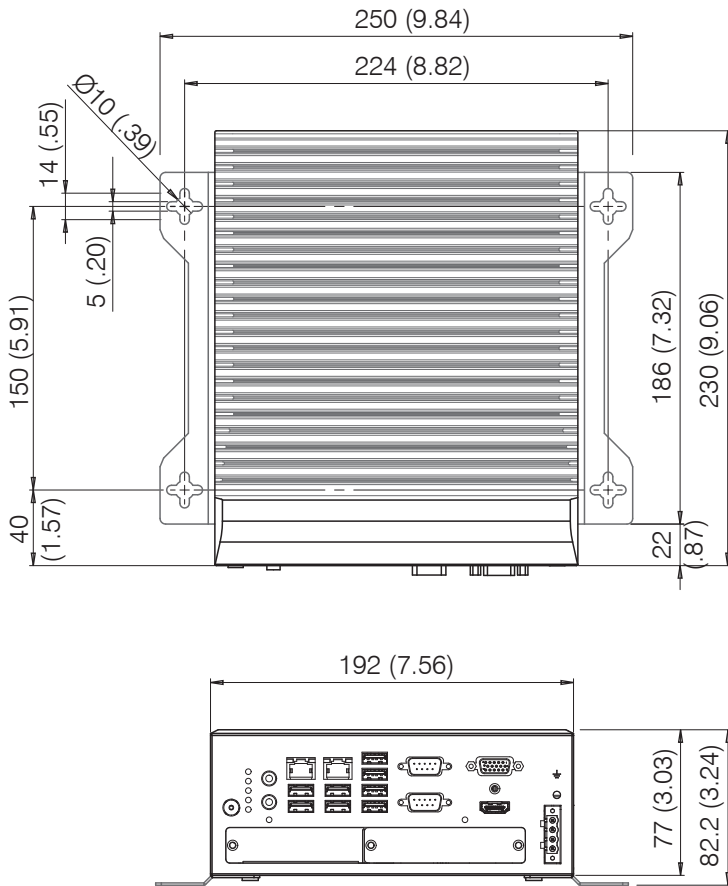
Dimensional drawing of SC2500 controller with mounting adapter, dimensions in mm (inches, rounded of)
